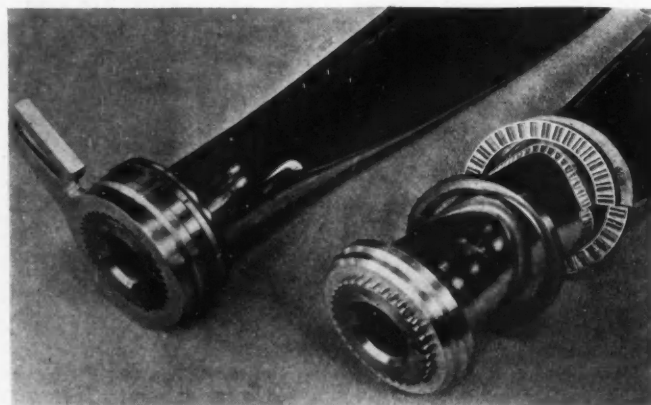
Blade Assembly with Bushings and Thrust Bearings
